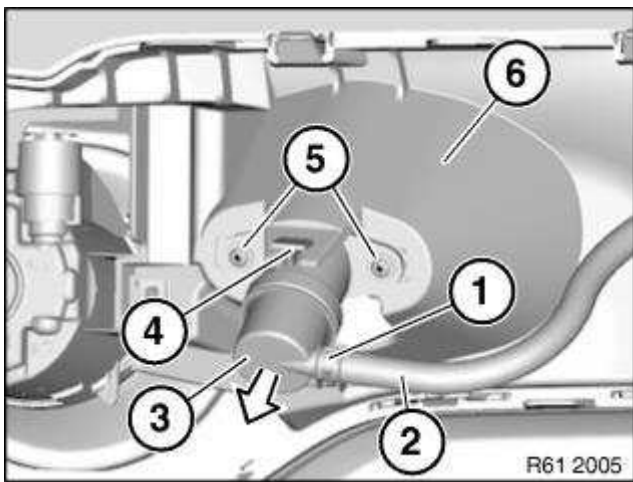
Make Sure Guide (4) Is Correctly Seated On Bumper Trim (6)
